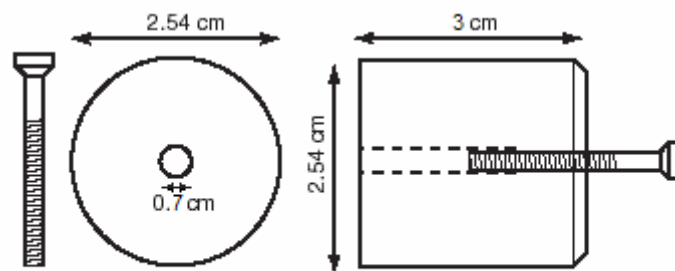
Drawing of the polishing tool, adjusting screw for mounting crystals.
